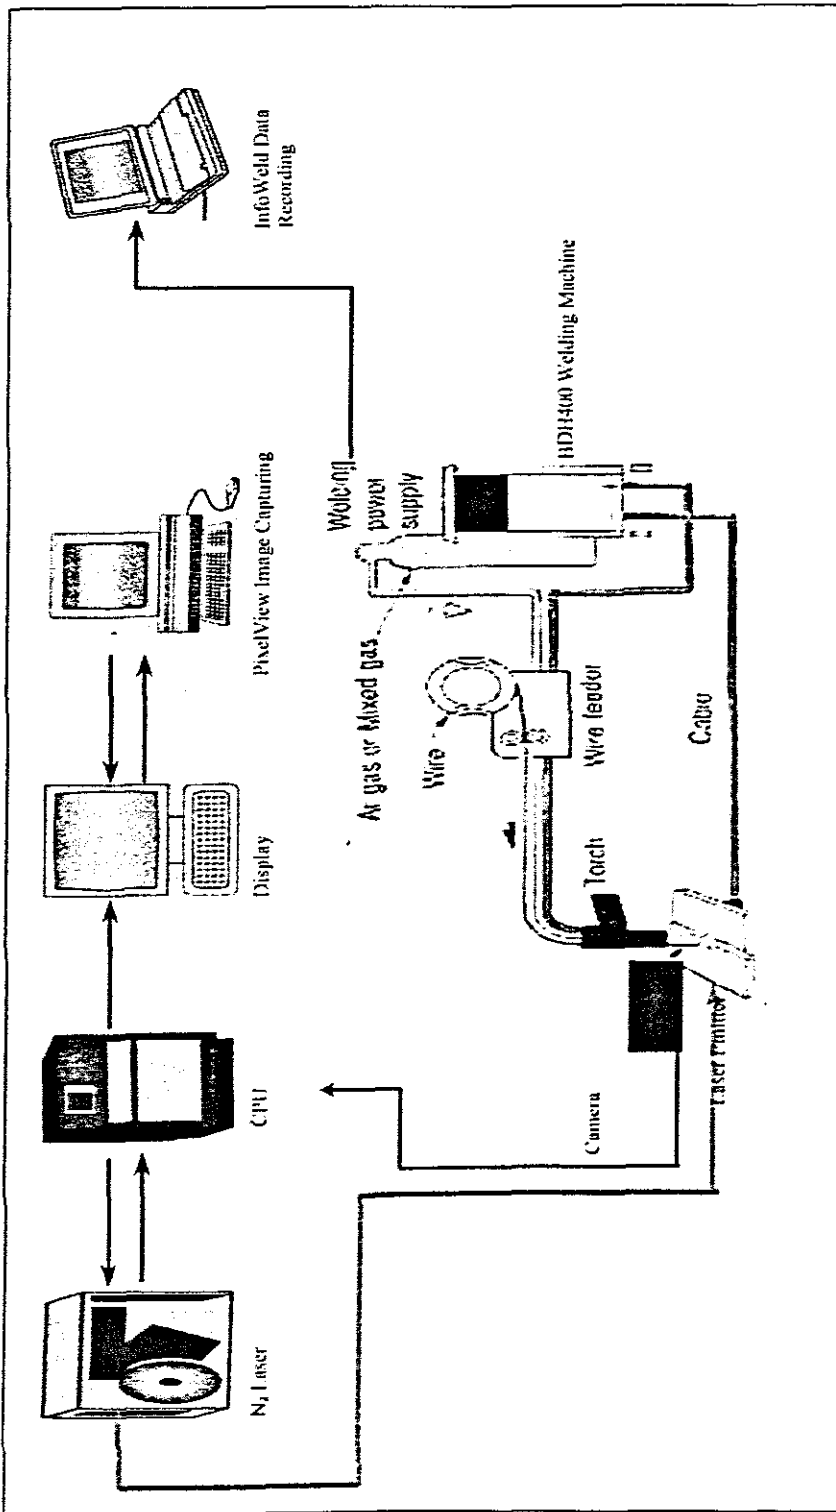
Schematic Layout of Welding Set-up
